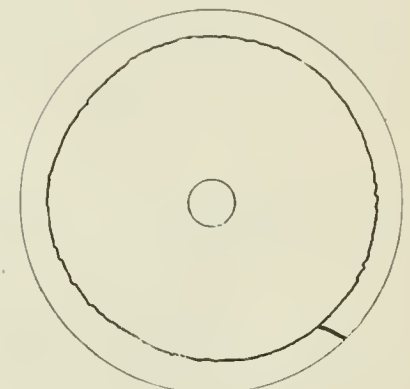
CHART OF A 72-TOOTH MILLED GEAR RUNNING WITH A 24-TOOTH PINION, THE TEETH OF THE LATTER HAVING BEEN CORRECTED TO TRUE INVOLUTE FORM BY GRINDING
